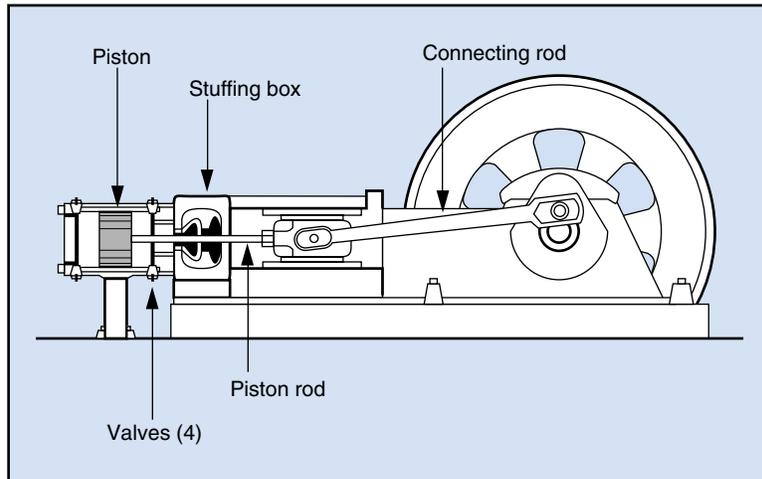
Cylinder arrangements in reciprocating compressors
